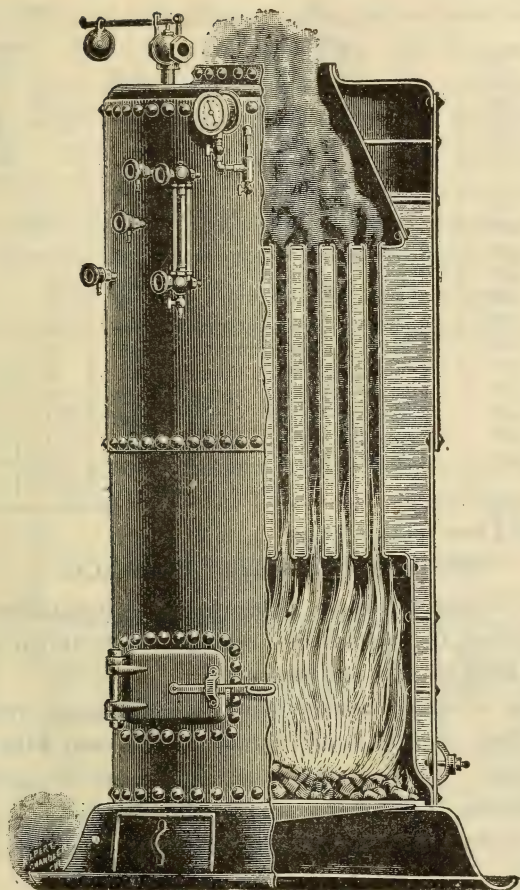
Showing the proper place for gauge-cocks in a submerged tube boiler.
